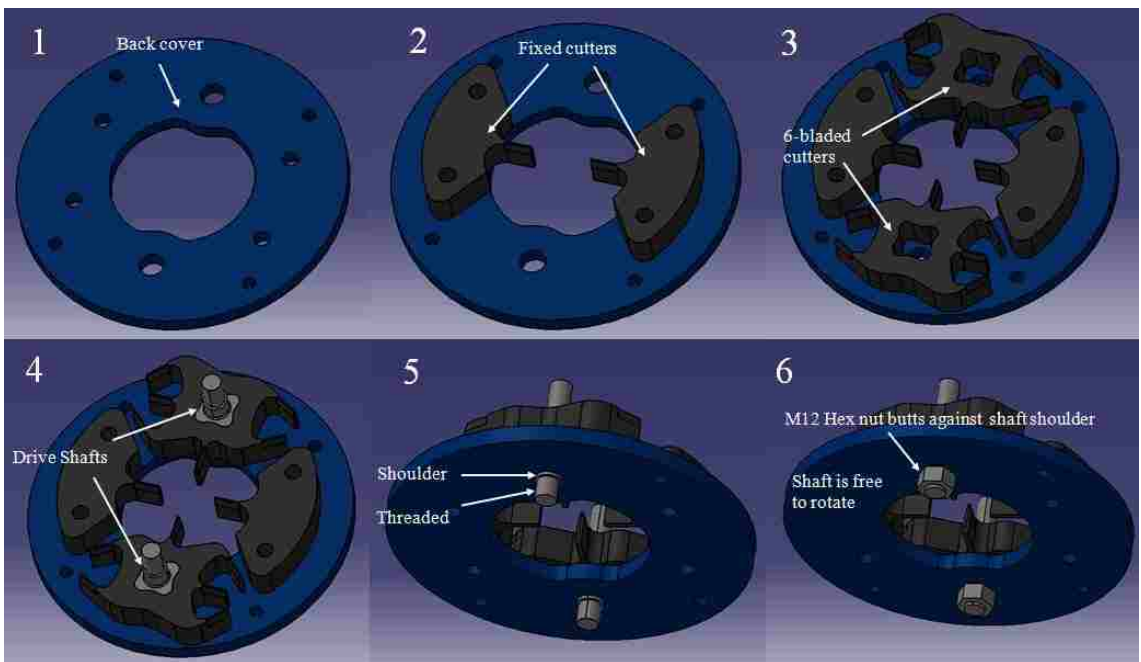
Step-by-step assembly of direct-drive adaptive cutter device.
